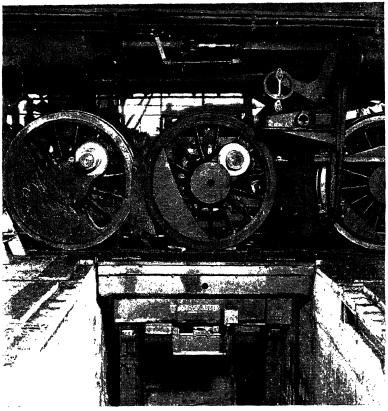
Special-purpose handling. A set of locomotive driving wheels to be removed for servicing can be got out by either lifting the locomotive or dropping the wheels. When only one set at a time is to be serviced, the latter method is more economical. The locomotive is set with the desired wheels in position, the side rods and other anchorage removed, and the wheel set lowered. See Fig. 218. (Shaw-Box.)
